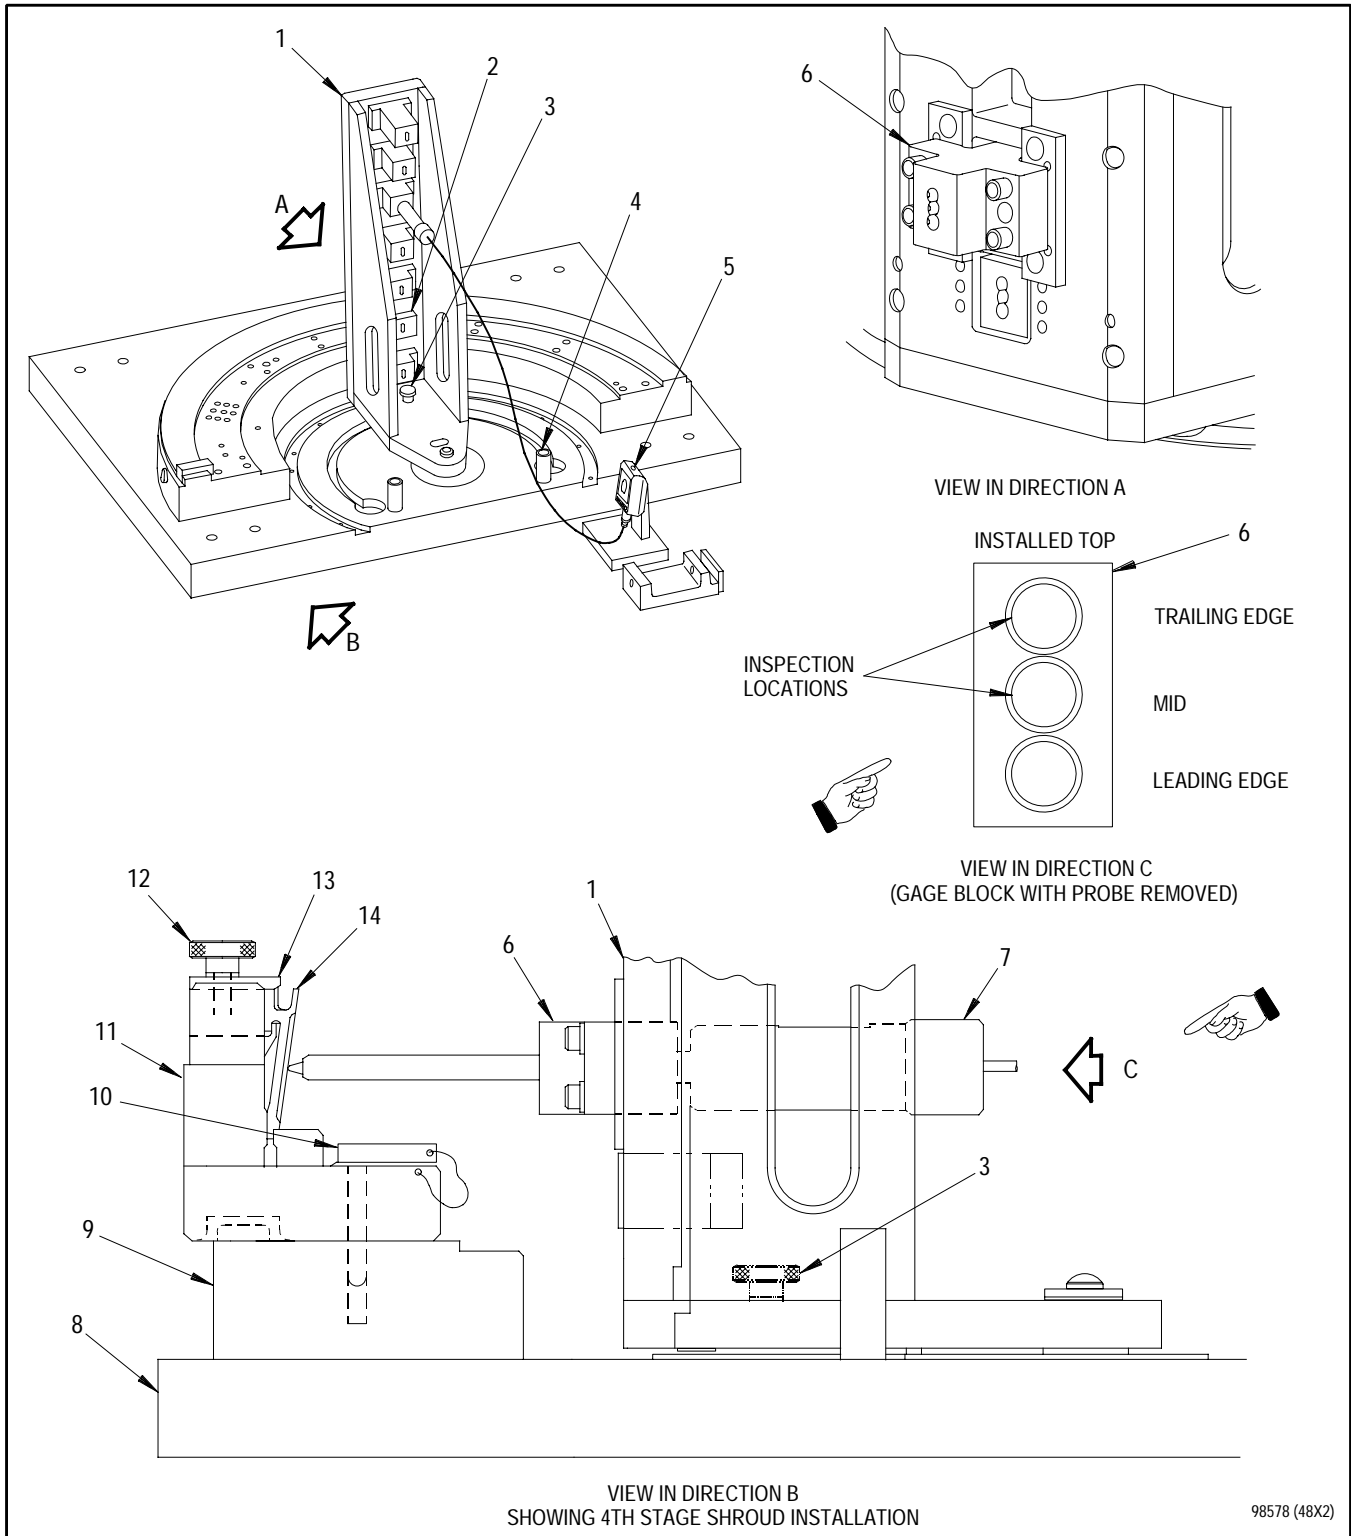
Fourth Stage Compressor Blade Tip Shroud - Radial Clearance Measurement
